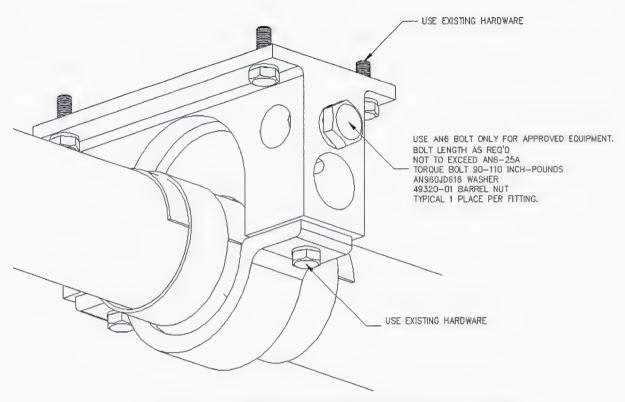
Installation of External Attachment Provisions (Forward shown, Aft similar)
